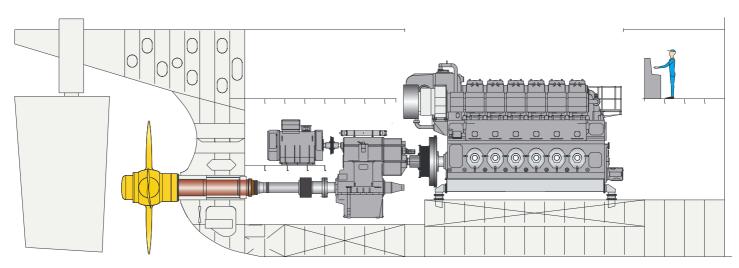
Propeller equipment type VBS - ODF (6L48/60B engine, reduction gear, VBS1380 propeller)
